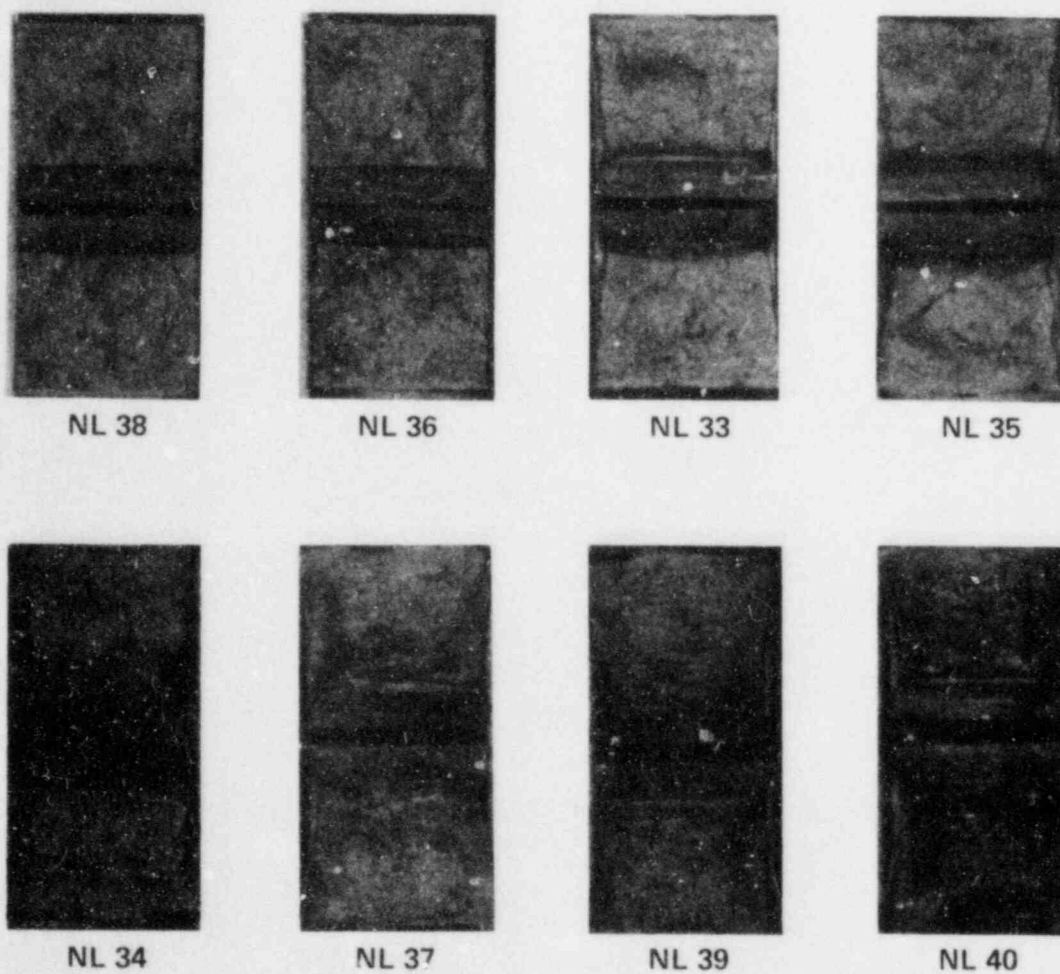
Charpy Impact Specimen Fracture Surfaces for Sequoyah Unit 2 Pressure Vessel Intermediate Shell Forging 05 (Tangential Orientation)
